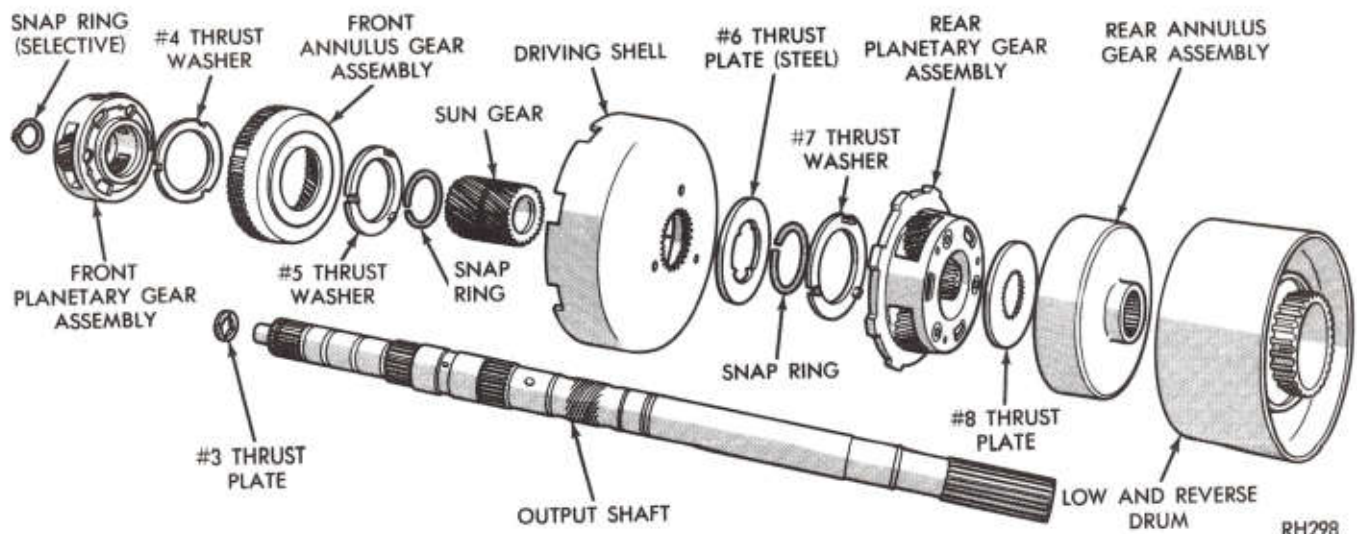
Planetary Gear Train and Output Shaft (A-727)
